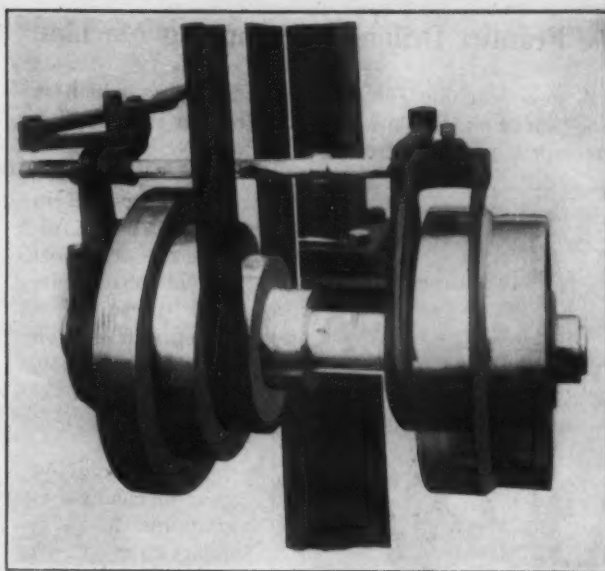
Detail of the Countershaft on the Avey Drill Press.
